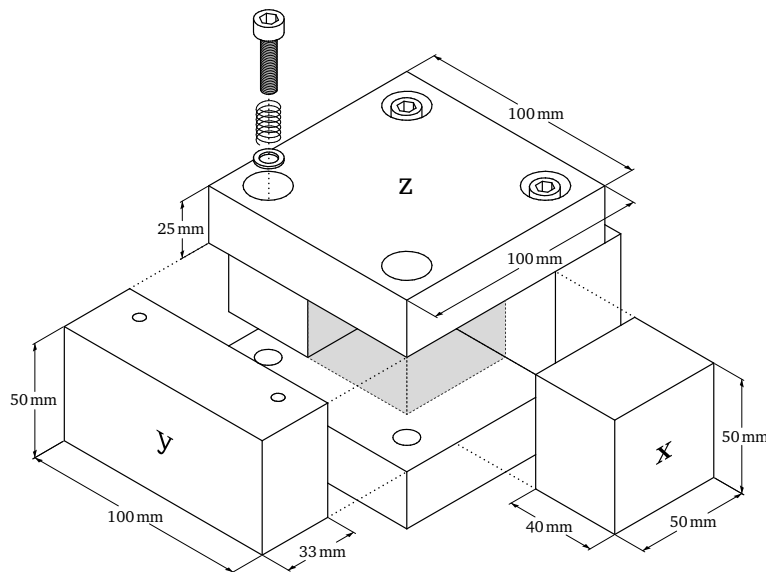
Sand loading box dimensions, assembly and axes convention. Specimen location is shaded.
